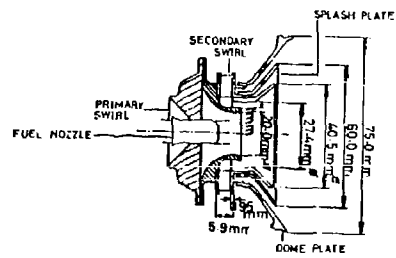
THE PRIMARY ZONE SWIRL ASSEMBLY.
